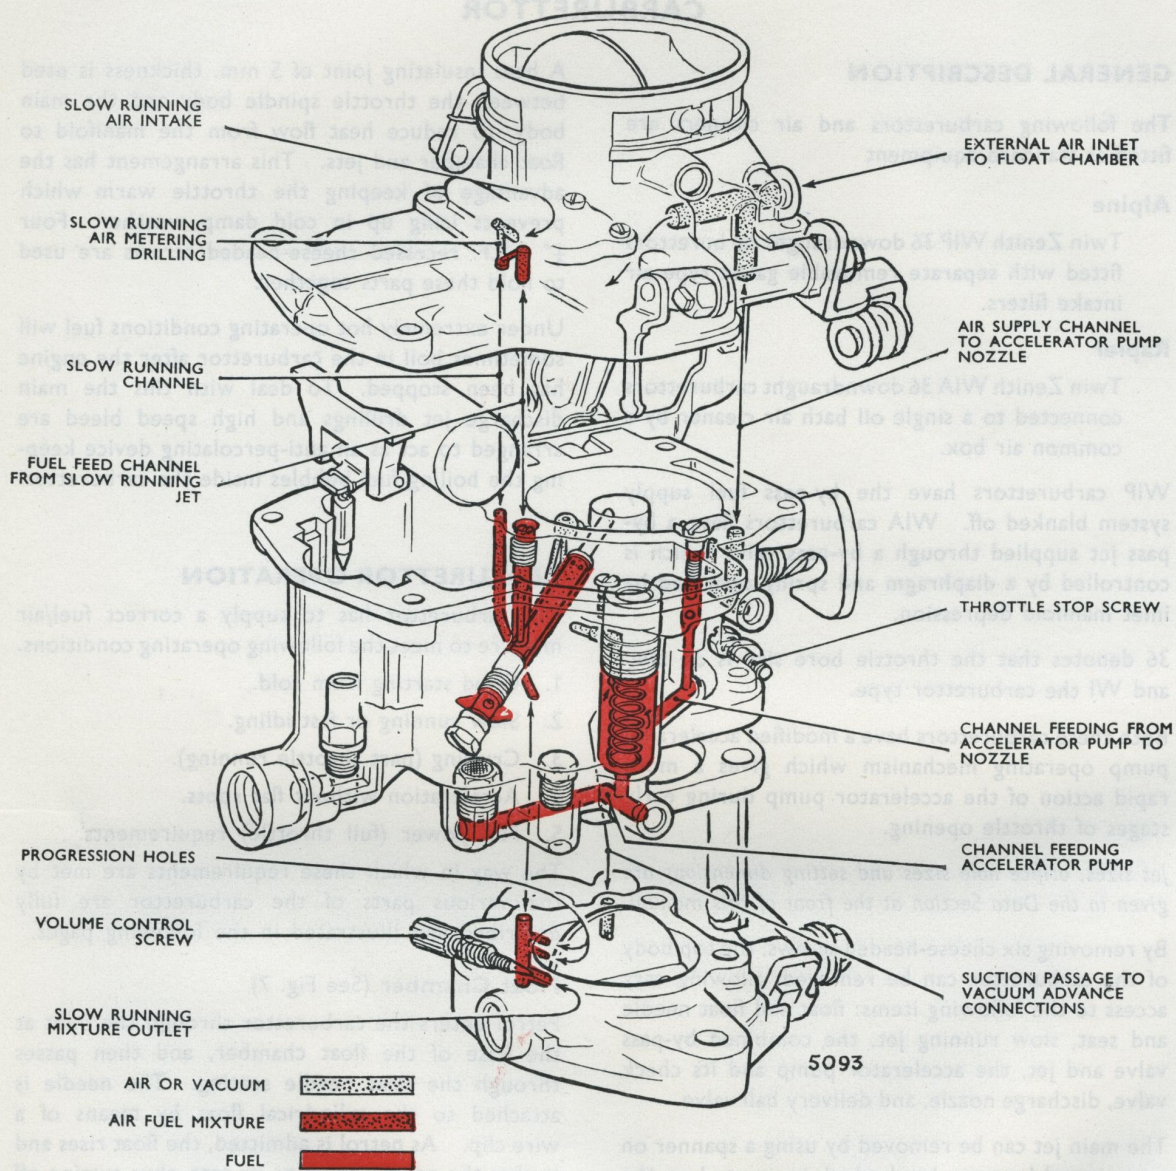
Zenith WIP 36 carburettor. Arrangement of channels
